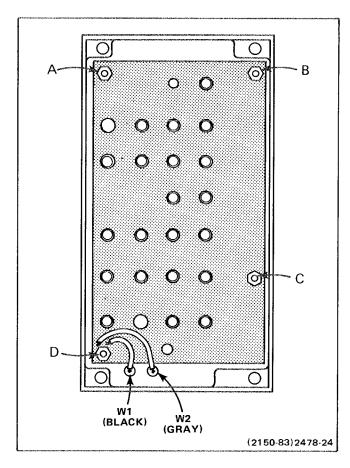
Locations of hex securing spacers and wiring to be disconnected on A1 Formatter Keyboard circuit board.
